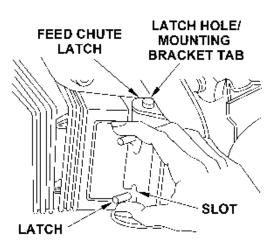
AP Feed Chute Guide Pin, Guide Pin Hole, and Latch Inspections.
